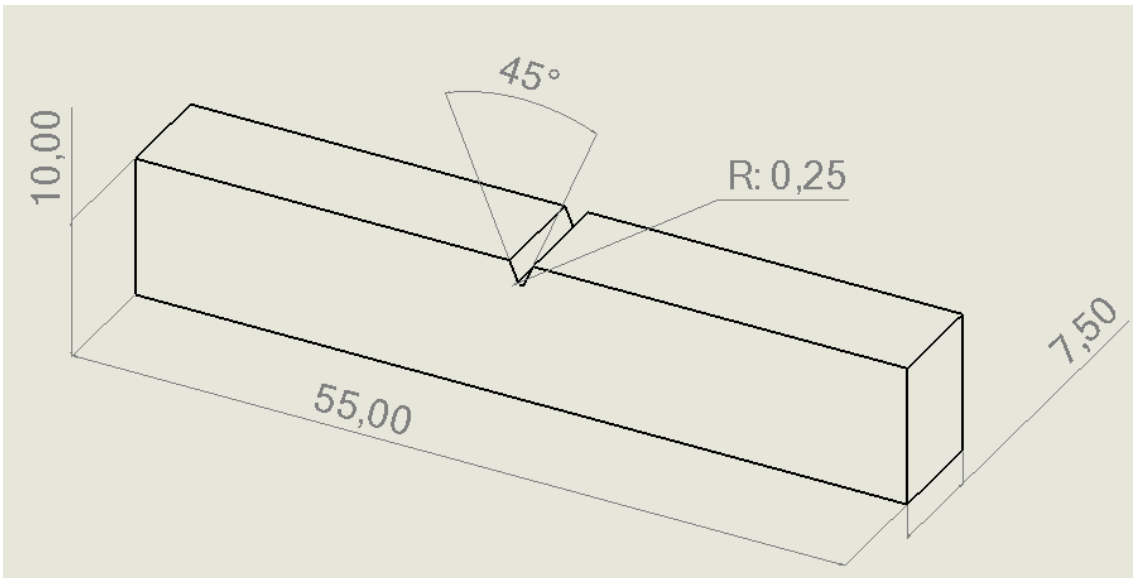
The specimen dimensions (in mm) used in hardness measurements
